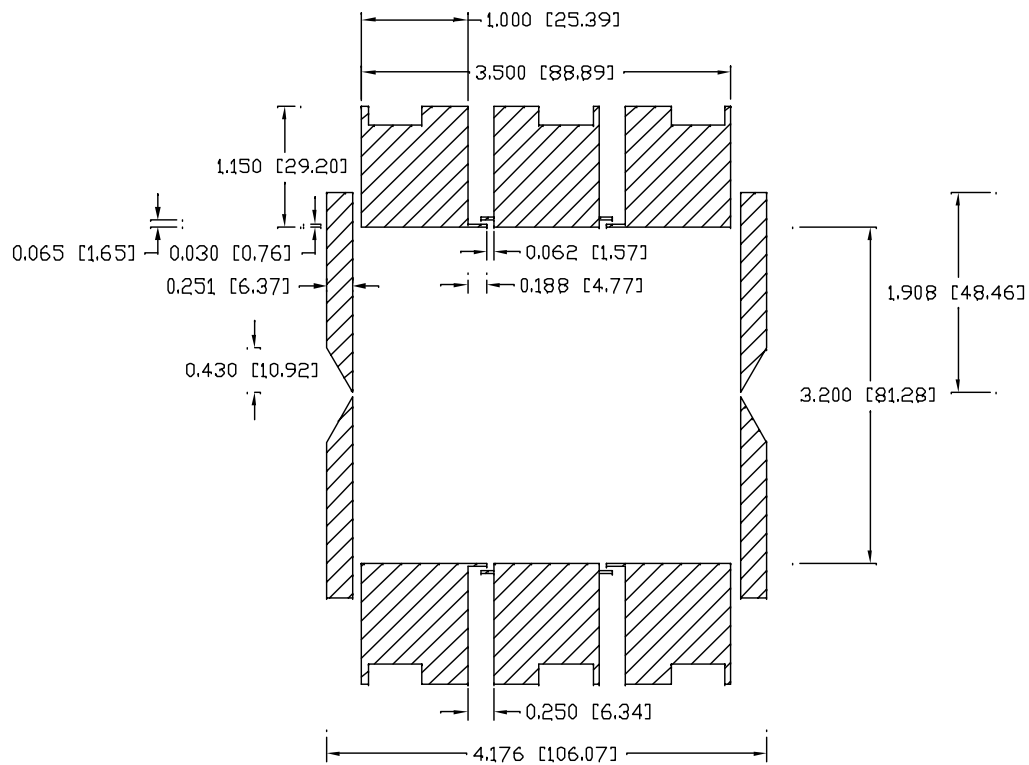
Technical drawing of the drift cell. Dimension in inches [mm].
